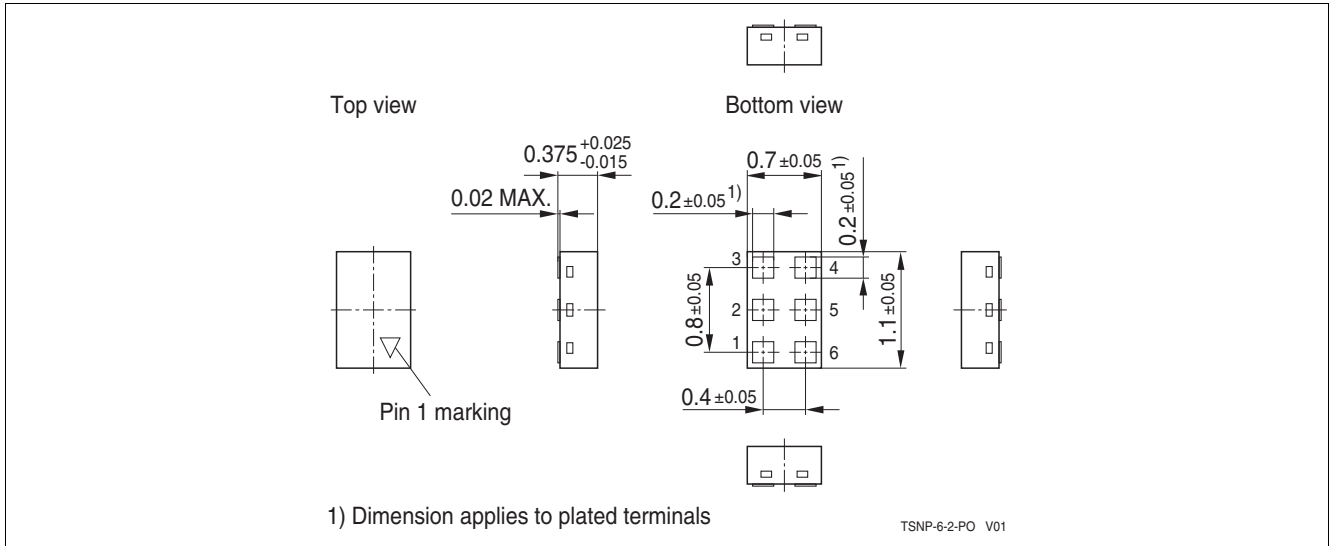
TSNP-6-2 Package Outline (top, side and bottom views)
